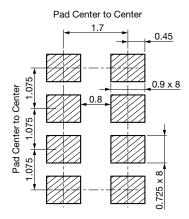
VCNL4040M3OE-H3 and H5 PCB Layout Footprint
